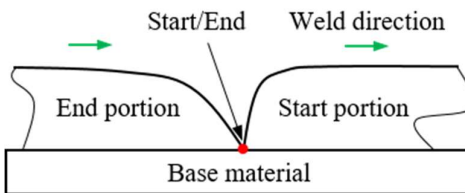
A schematic of the start and end portion in a closed weld pass
